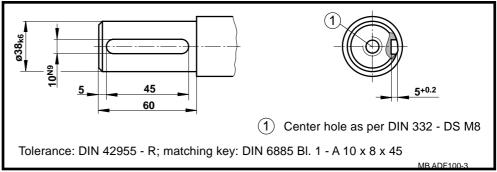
Main spindle motor ADF 100 - output shaft with key
